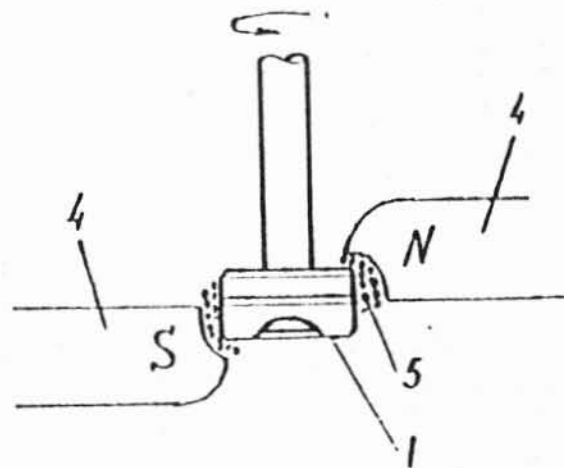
Schematic of MAF for finishing of sewing machine parts
